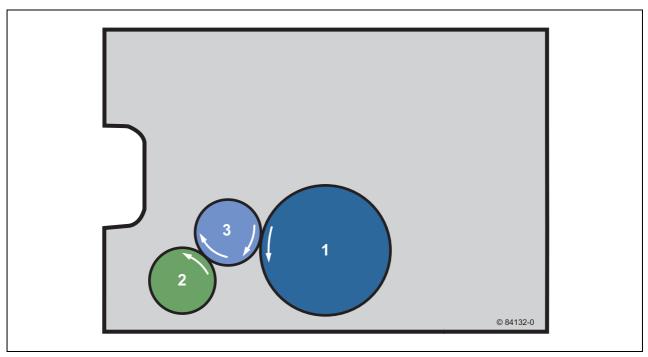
Wheel drive of the mass compensation shaft on the drive side
